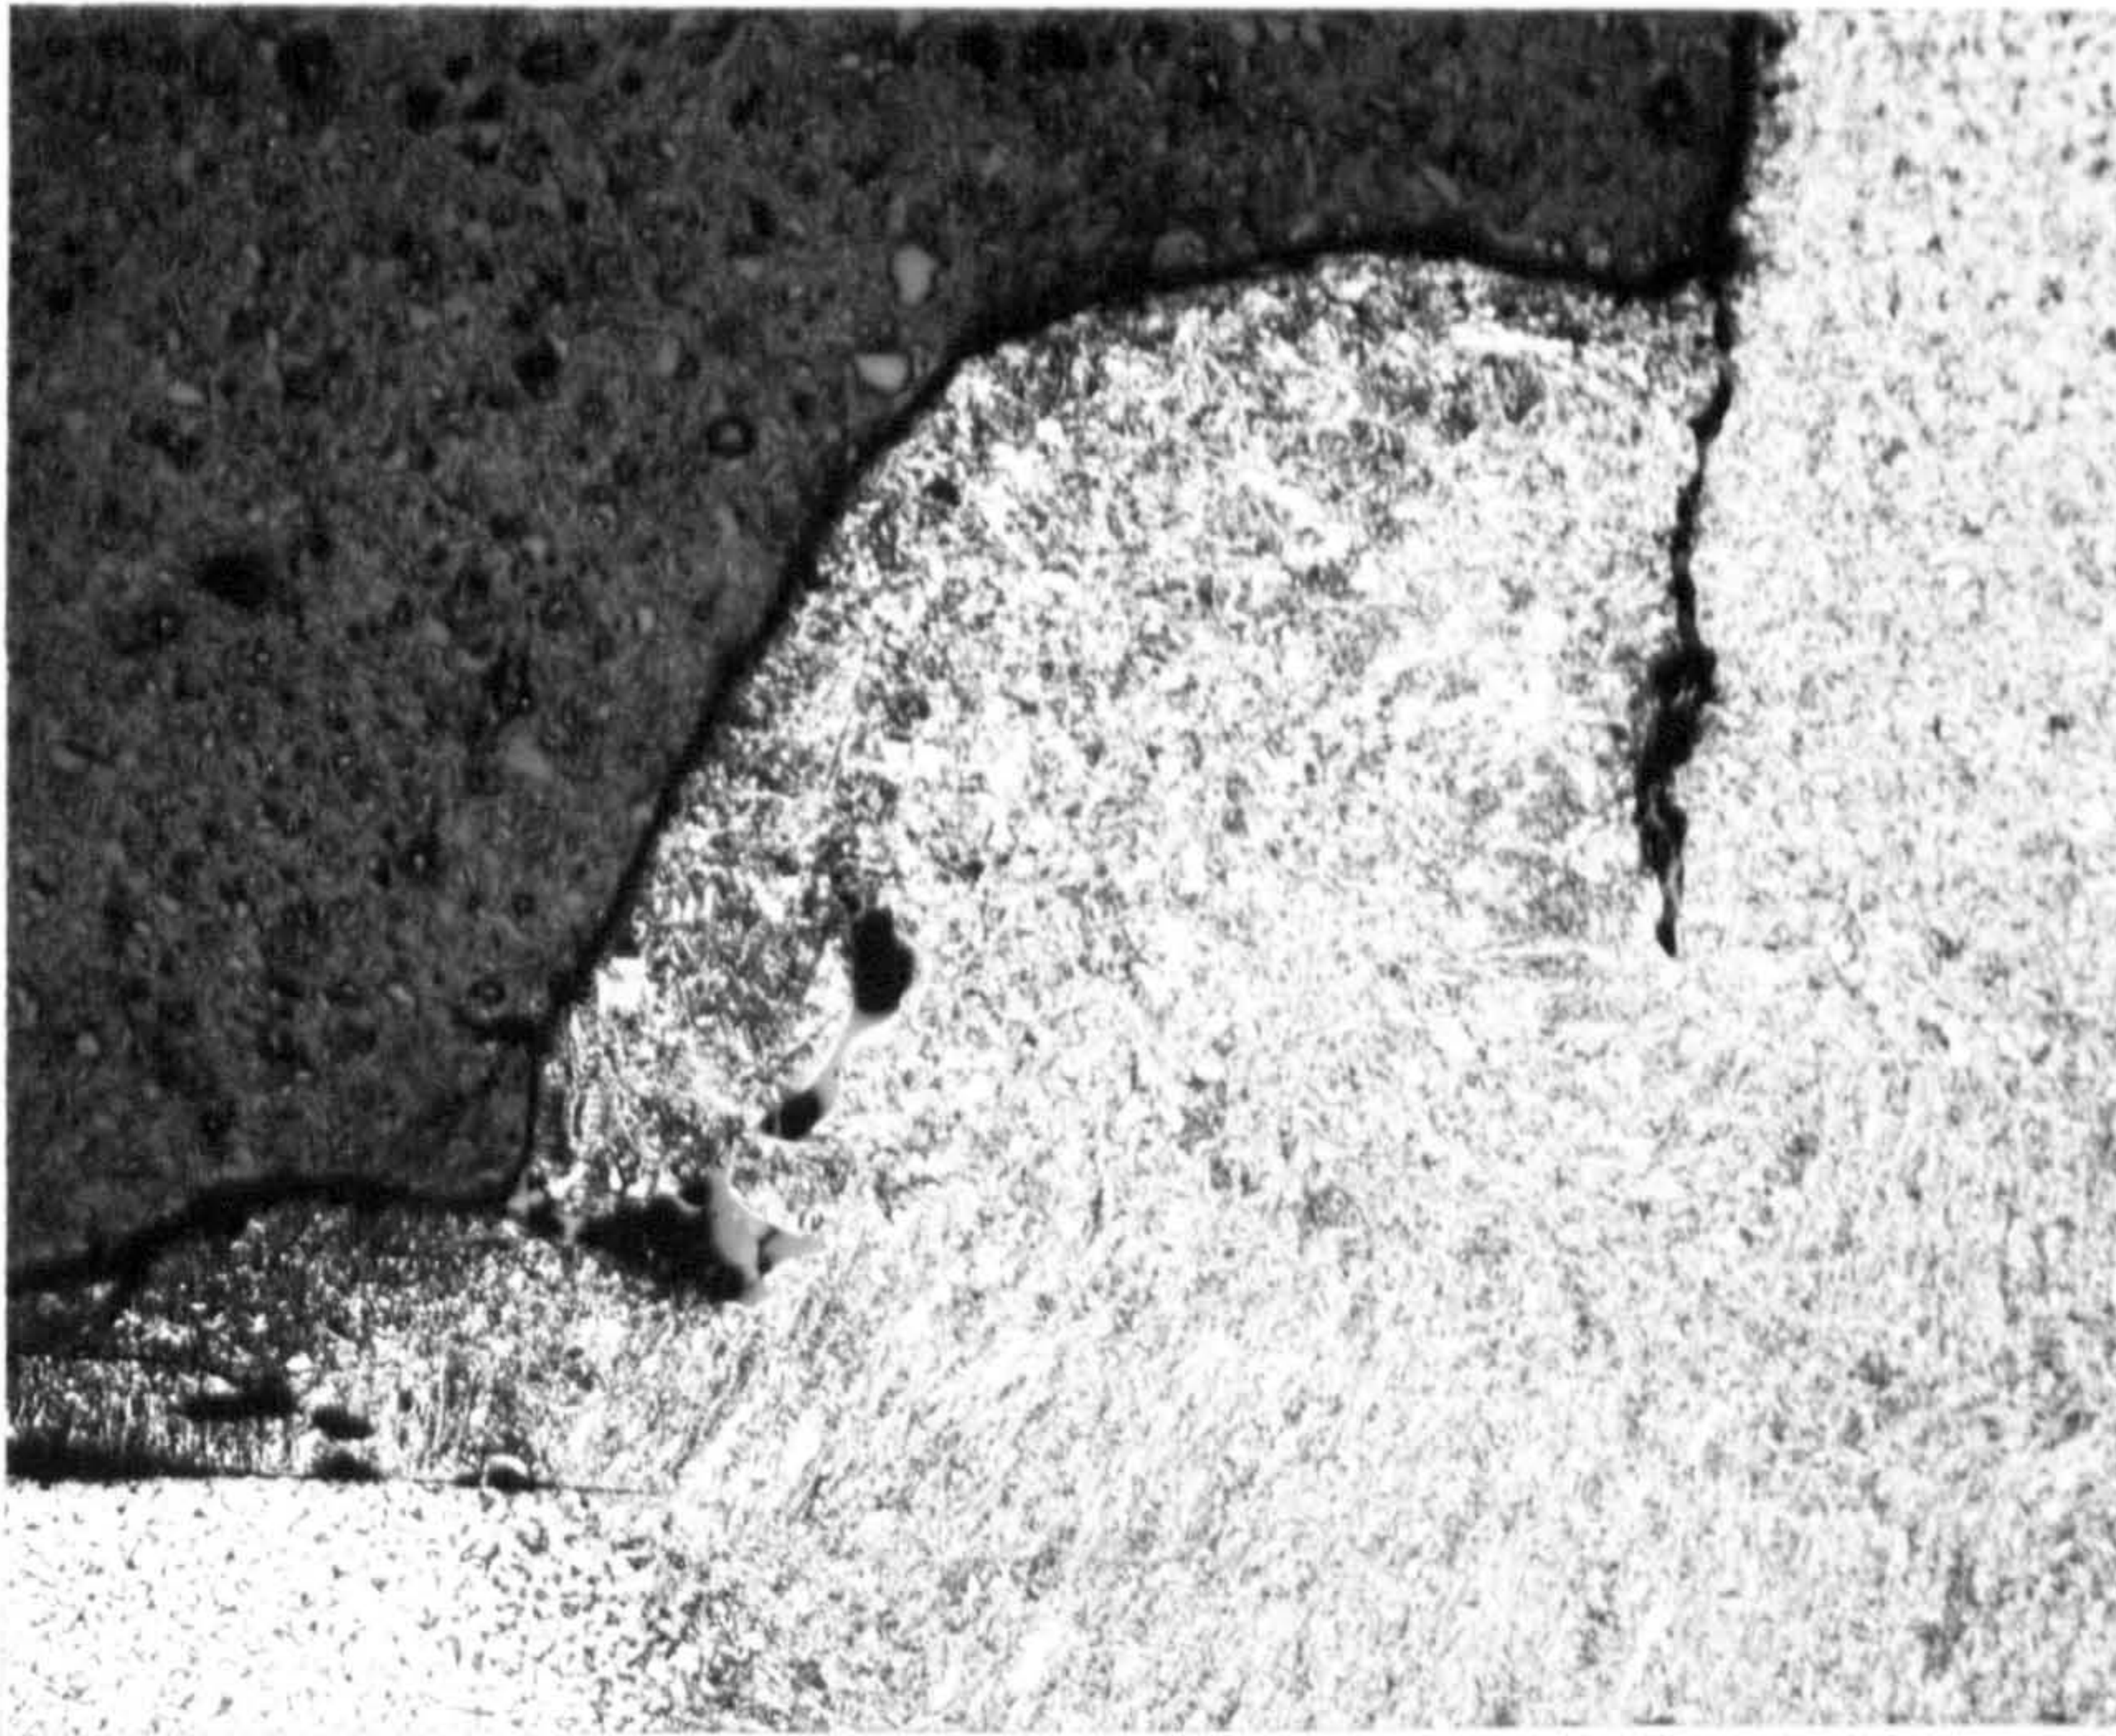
Emergent bead of a 12mm skid weld. Molten material has been forced out at the molten zone without full fusion (x32).
